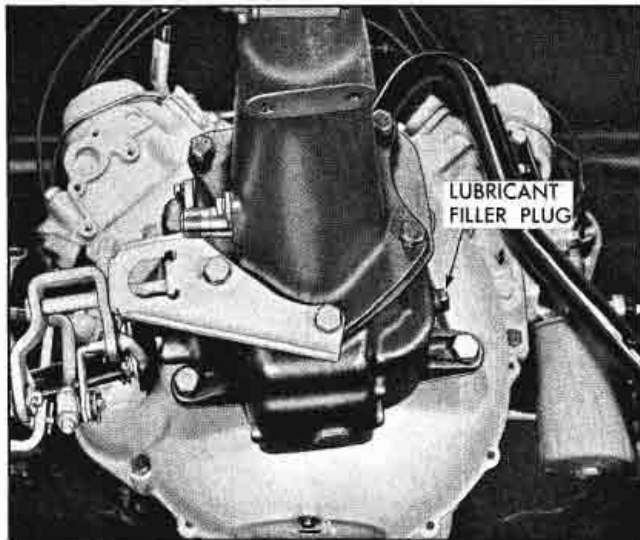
Synchro-Mesh Transmission Filler Plug
